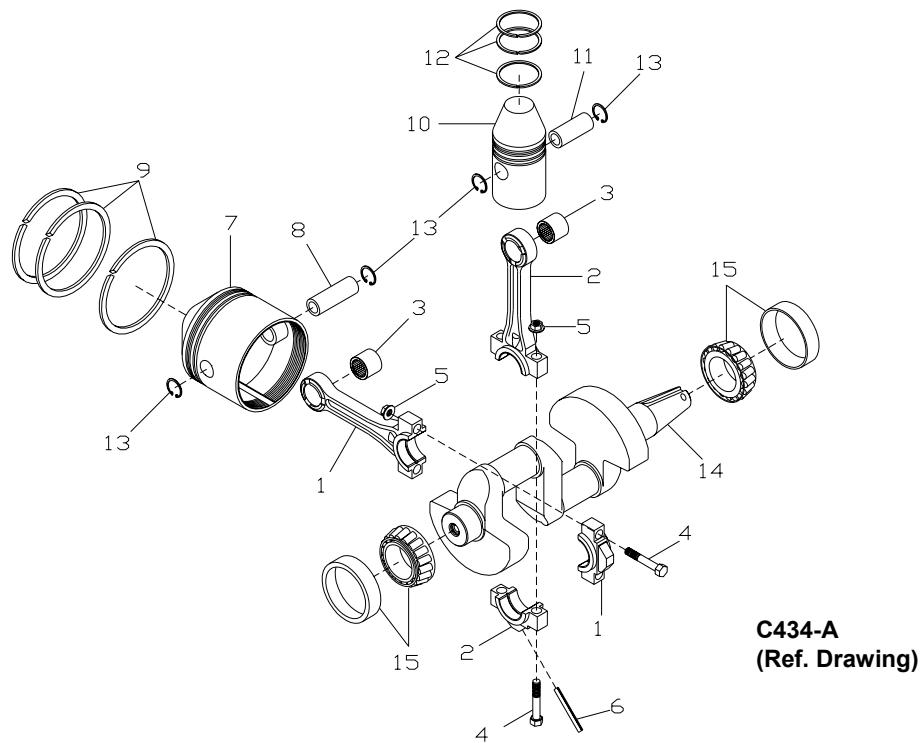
Replacement Parts Illustration for Crankshaft, Pistons and Connecting Rod Assembly
